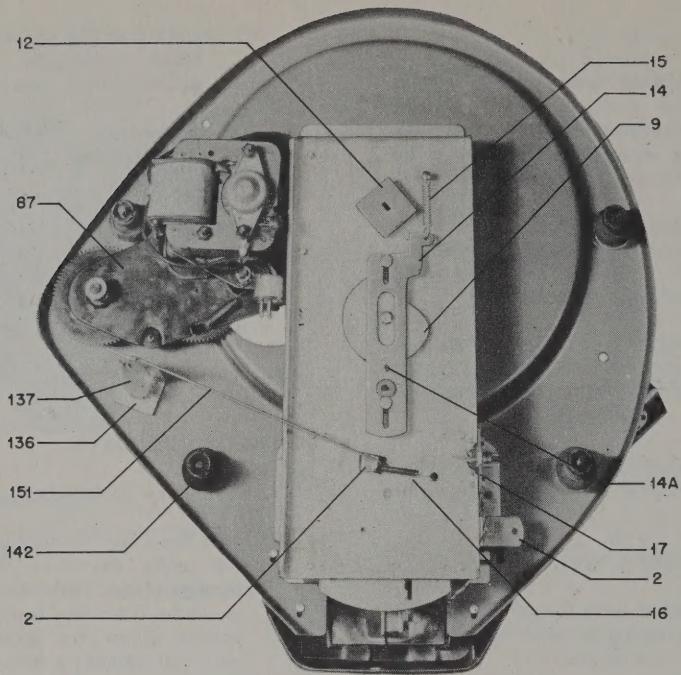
BOTTOM VIEW OF RECORD CHANGER
